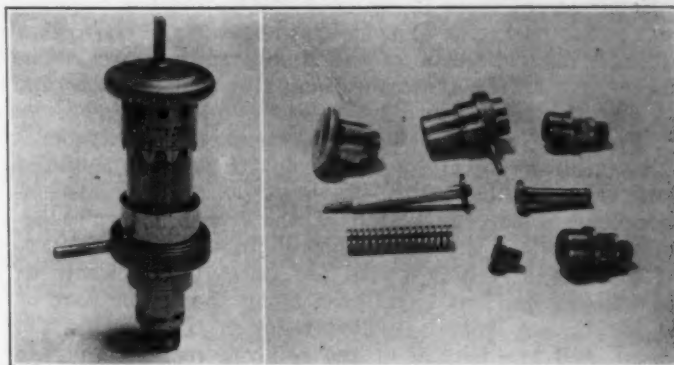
LIQUID-COOLED OKILL INDICATOR FOR DETERMINING COMBUSTION-CHAMBER PRESSURES
